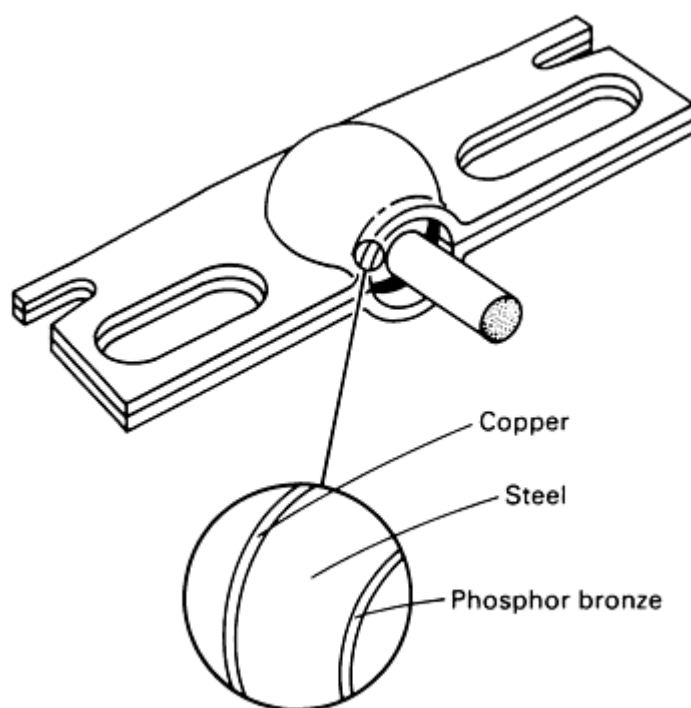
Clad metal windshield wiper socket, which consists of copper-clad, steel-clad phosphor bronze
